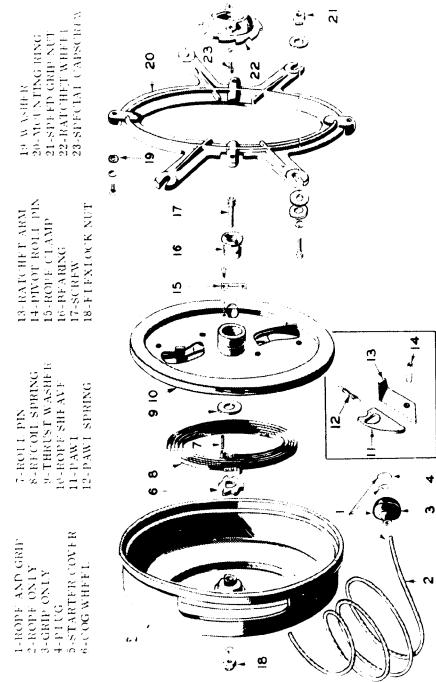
SERVICING (Model D) READI-PULL STARTER
